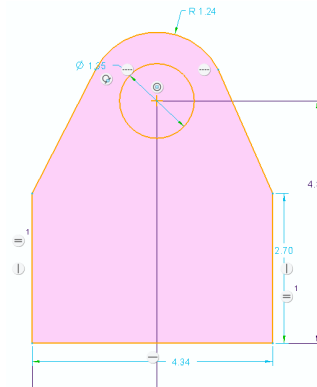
Sketch with all the entities, weak dimensions, and weak constraints
